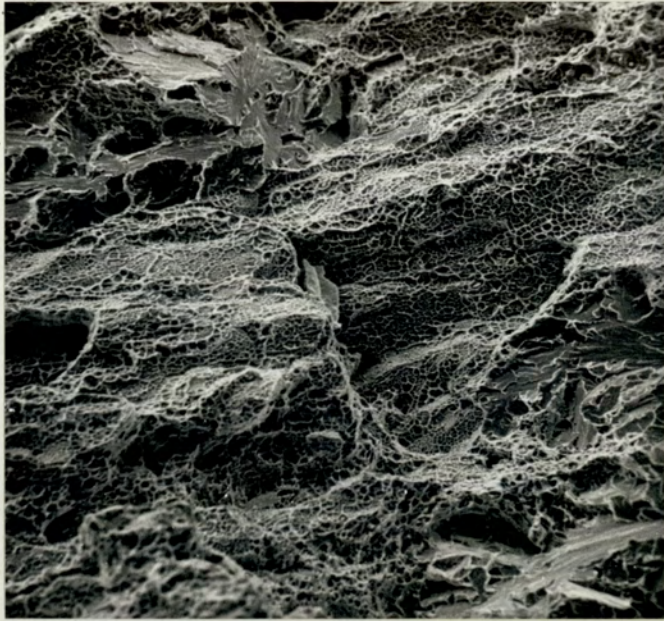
Extension of solidification crack in SE weld metal showing coarser dimple array. (Compare with Fig. 59).
